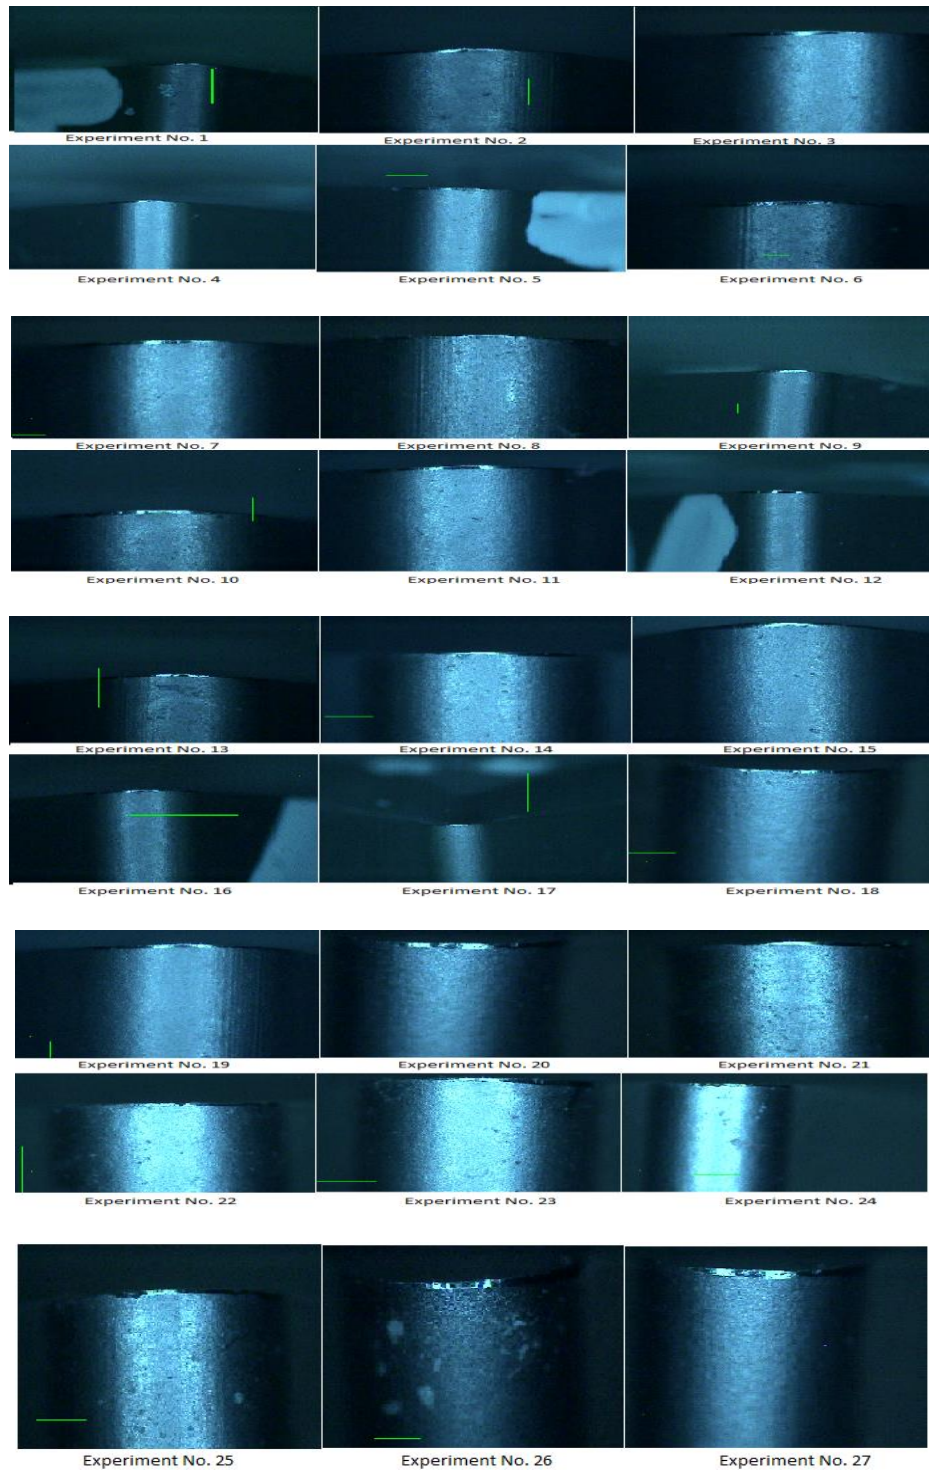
CMM Tool wear Pictures of Cemented Carbide tool
